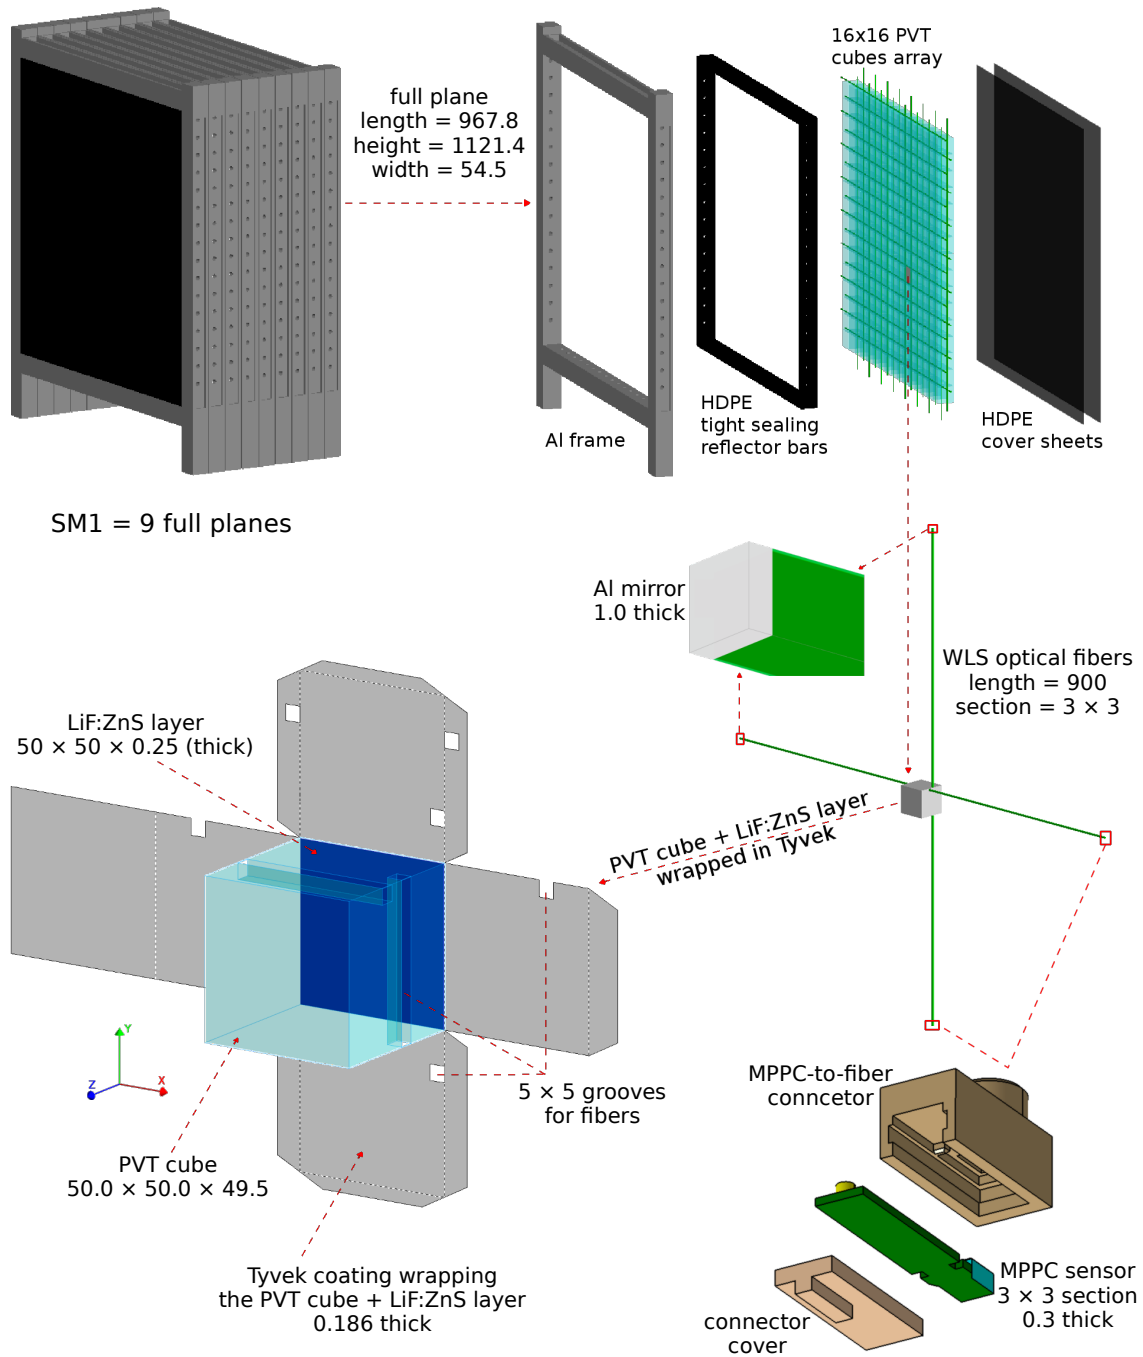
Diagram of the SM1 prototype detector, exploded frame, fibre readout and cube assembly. All indicated sizes are in mm.
